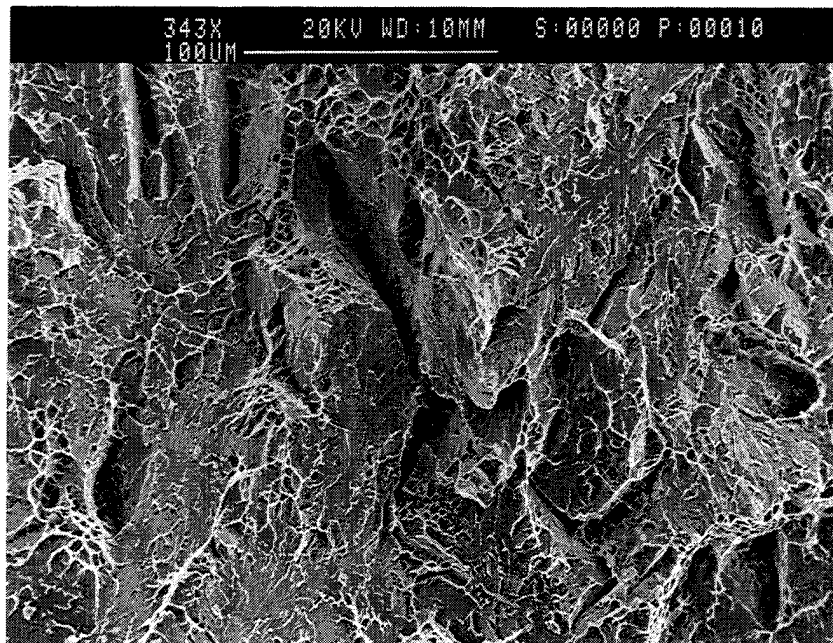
MV1 - GMA Weld Using C5 Cover Gas Showing Intergranular Cracking
